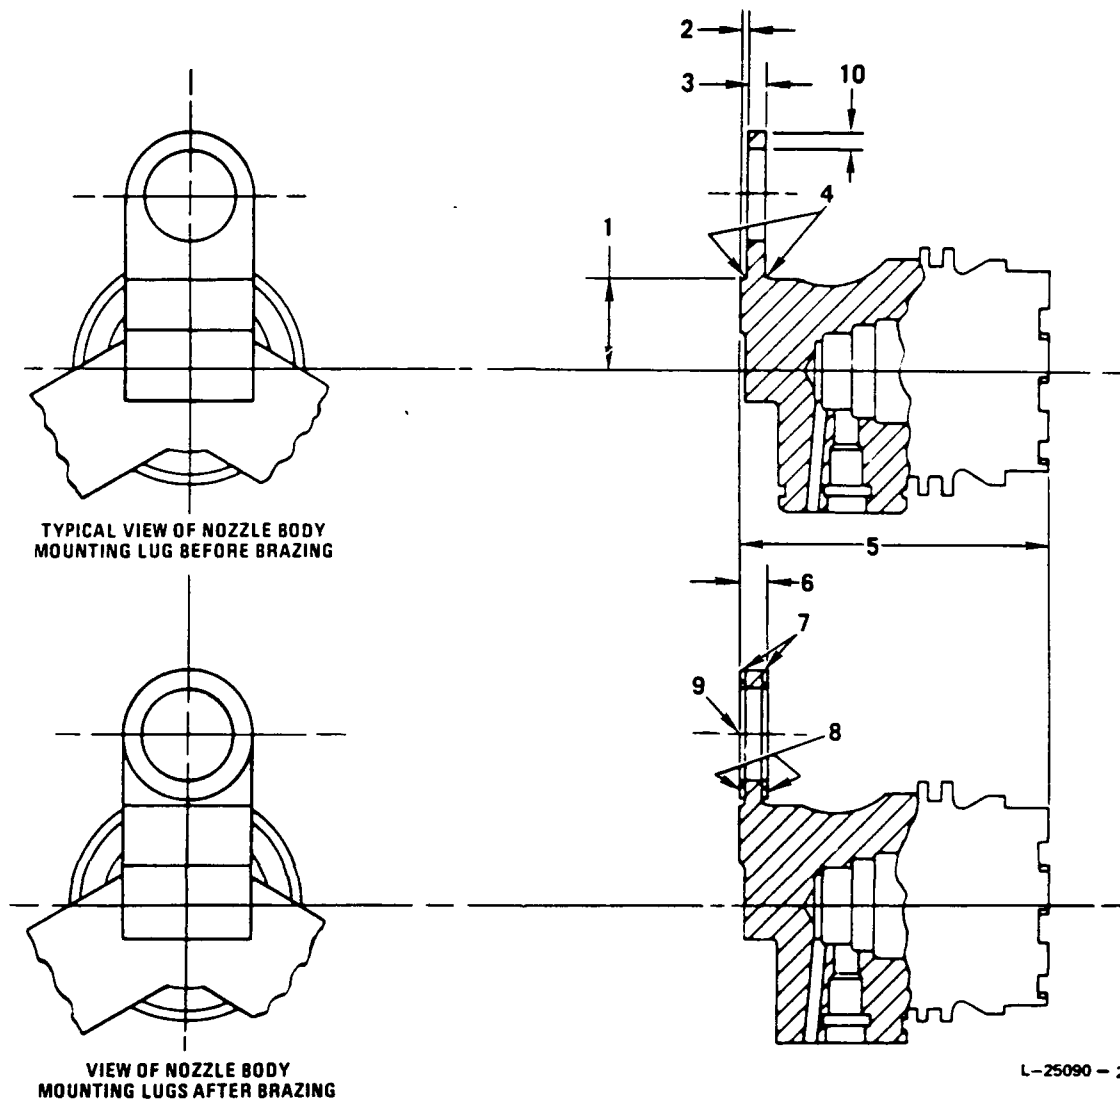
Inner Mounting Lug Bushings Incorporating Spacer - Inspection and Repair
